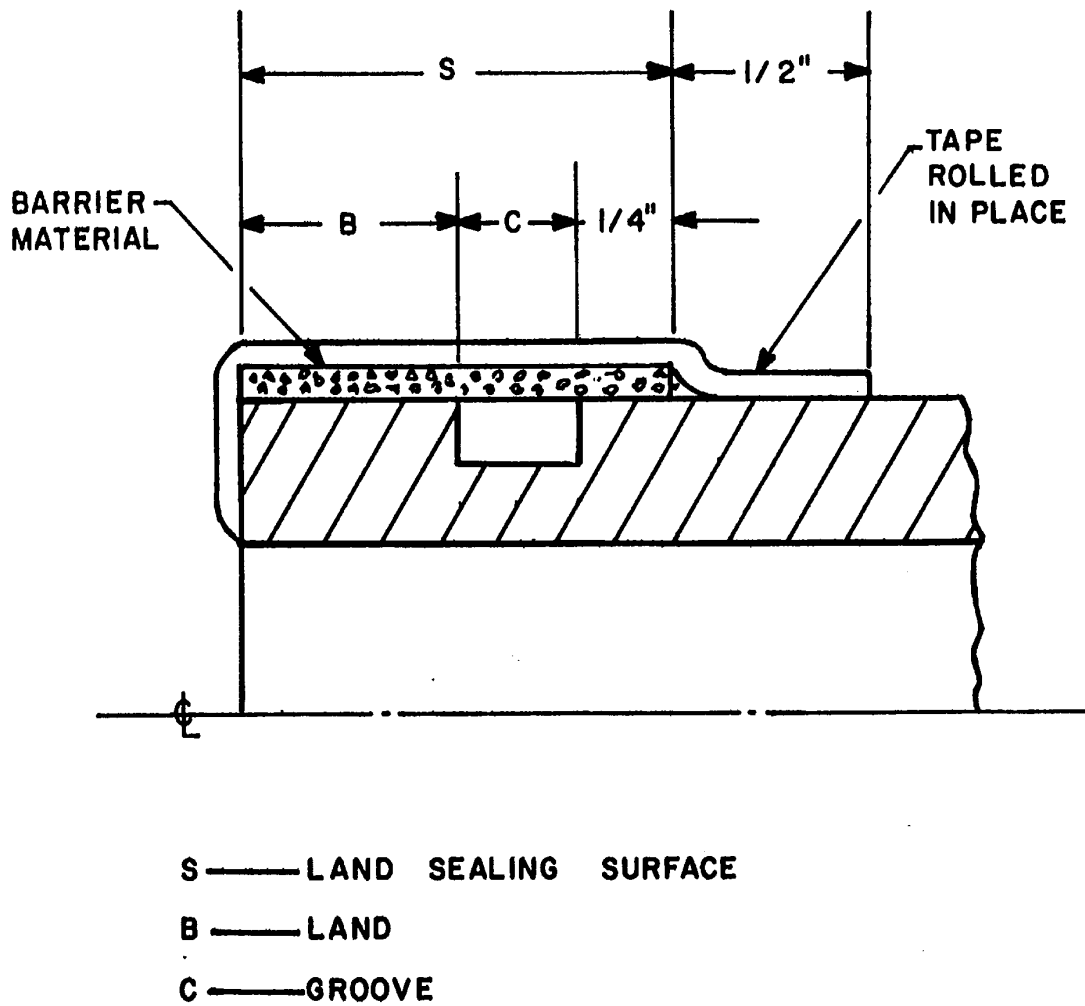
Land sealing surface for grooved end pipe, tube end fittings.
